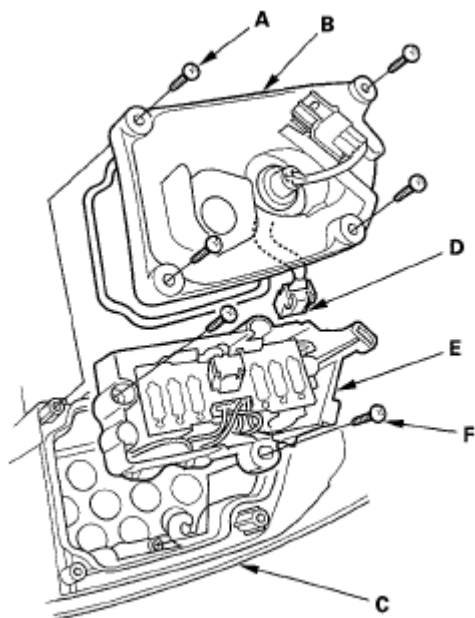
Identifying Four Screws, Back Cover, Taillight, Connector And Taillight/Brake Light Led
